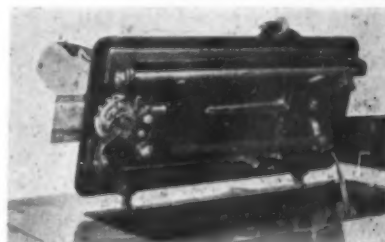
Mechanism of round-bobbin oscillating-action machine with bobbin in horizontal plane (when machine is in operating position).
